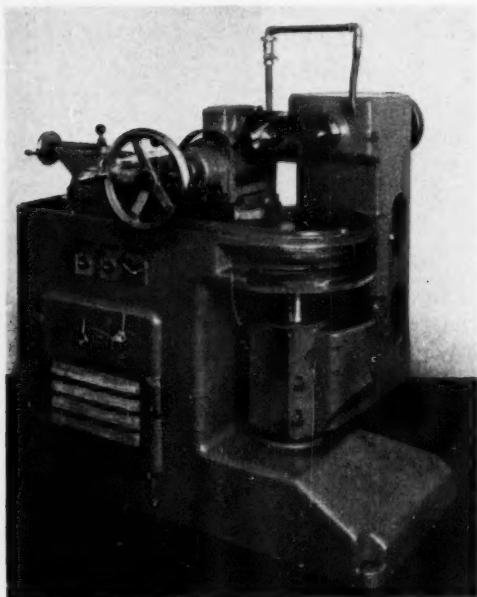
Traub Milling Machine for the Production of Drum- and Disc-type Cams for Use on Automatic and Other Machines
